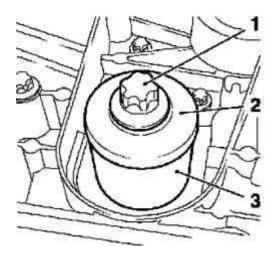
Heat sealing ring: 1 - pin 2 - Disc 3 - a special tool
